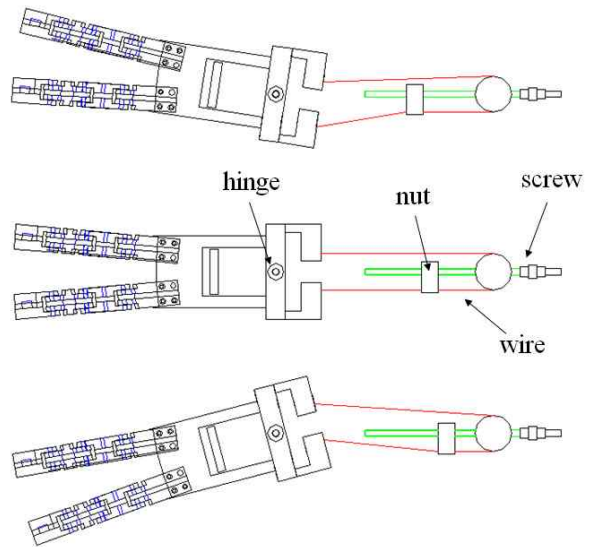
Screw-nut mechanism for wrist yaw and pitch
